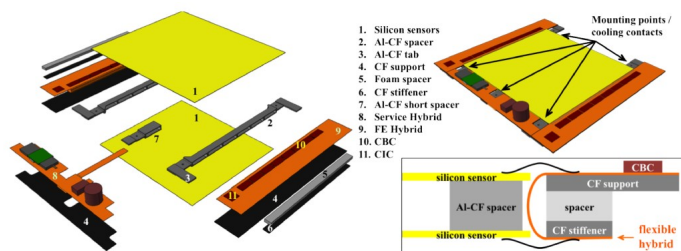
Exploded view of the 2S module components (left), 3D view of the assembled module (upper right), and a sketch of the FE Hybrid folded around its support (lower right).
